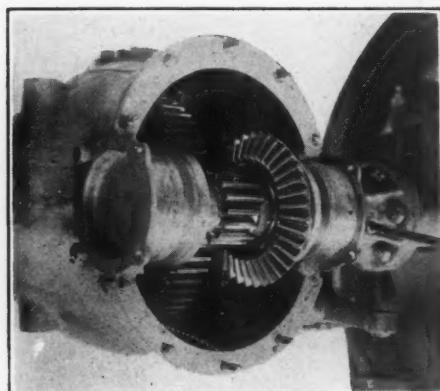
The Gear Box With Casing for Governor and Universal Joint at Back End
